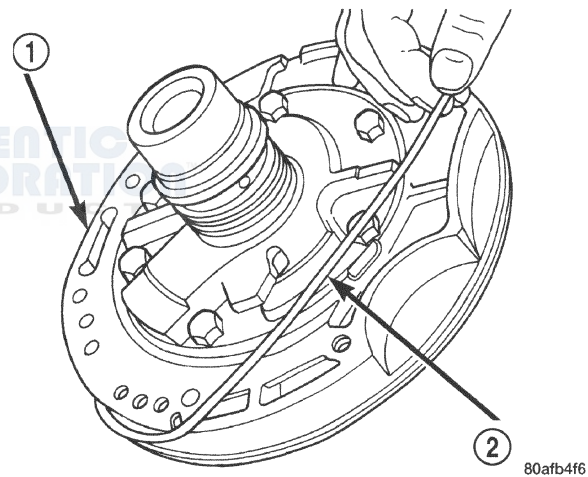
Select Thinnest No. 4 Thrust Plate
